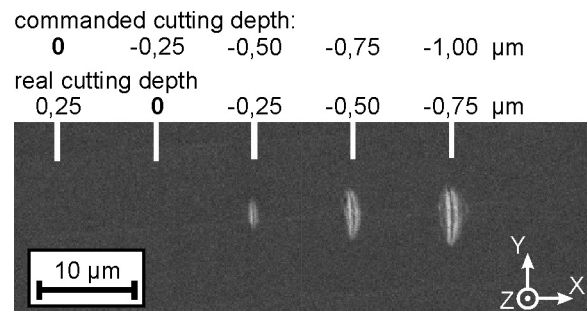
Cutting depth alignment of the diamond tool using discrete cutting marks
